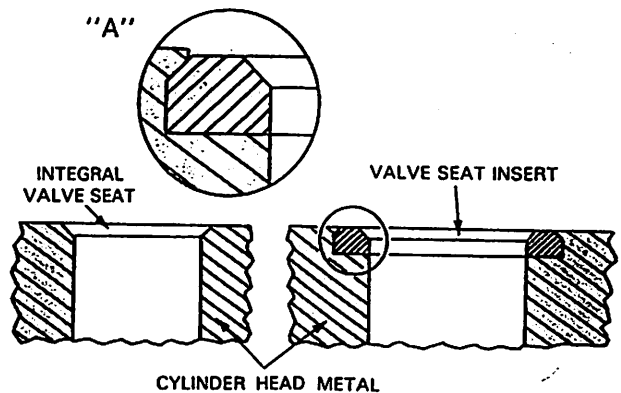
Valve insert is often frozen to shrink diameter, then pressed into warm head to secure insert. Head metal, A, can be peened over edge of insert to aid in securing.
